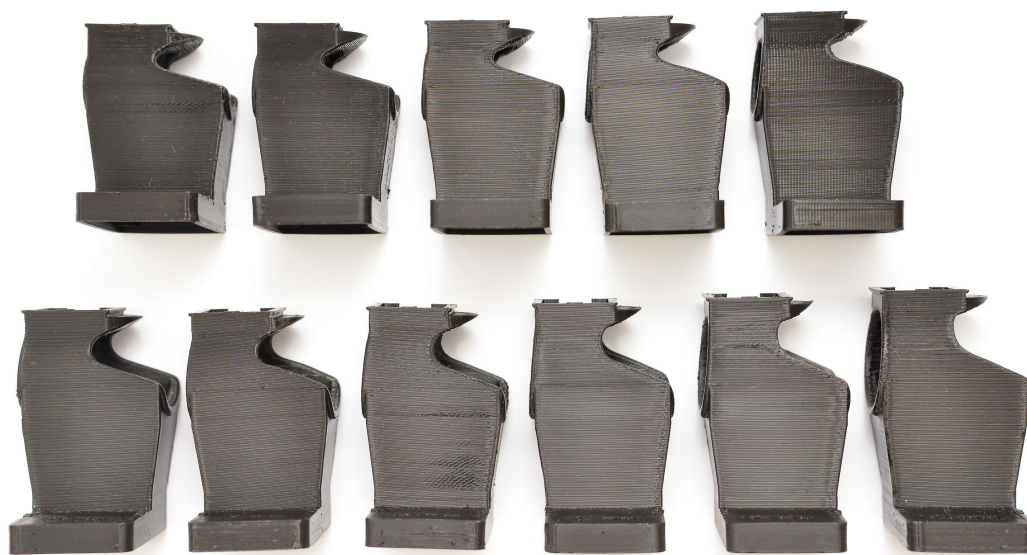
Ring finger holders: sizes 16 to 26 mm.
